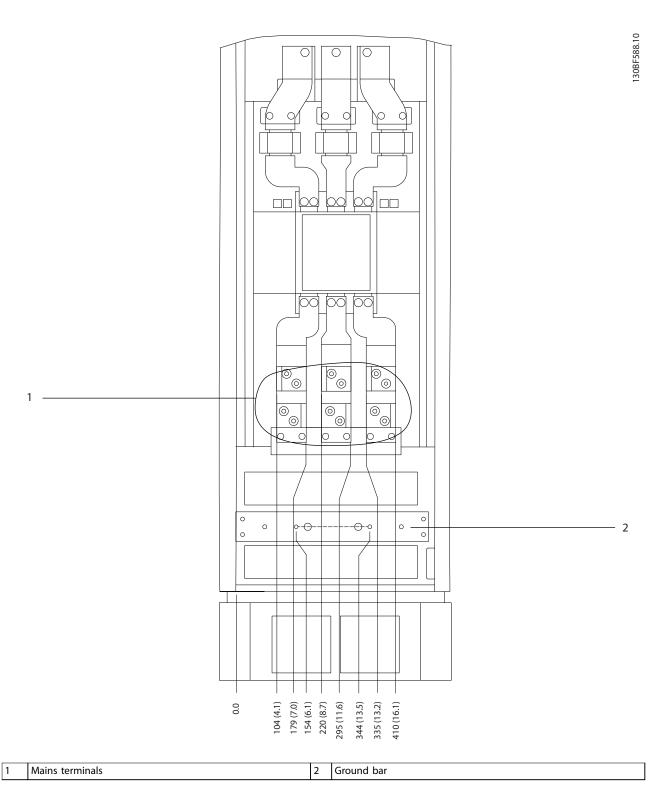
Terminal Dimensions for F3–F4 Options Cabinet with Circuit Breaker/Molded Case Switch, Front View
